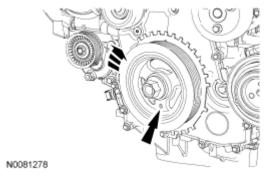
Turning Crankshaft Courtesy of FORD MOTOR CO.
